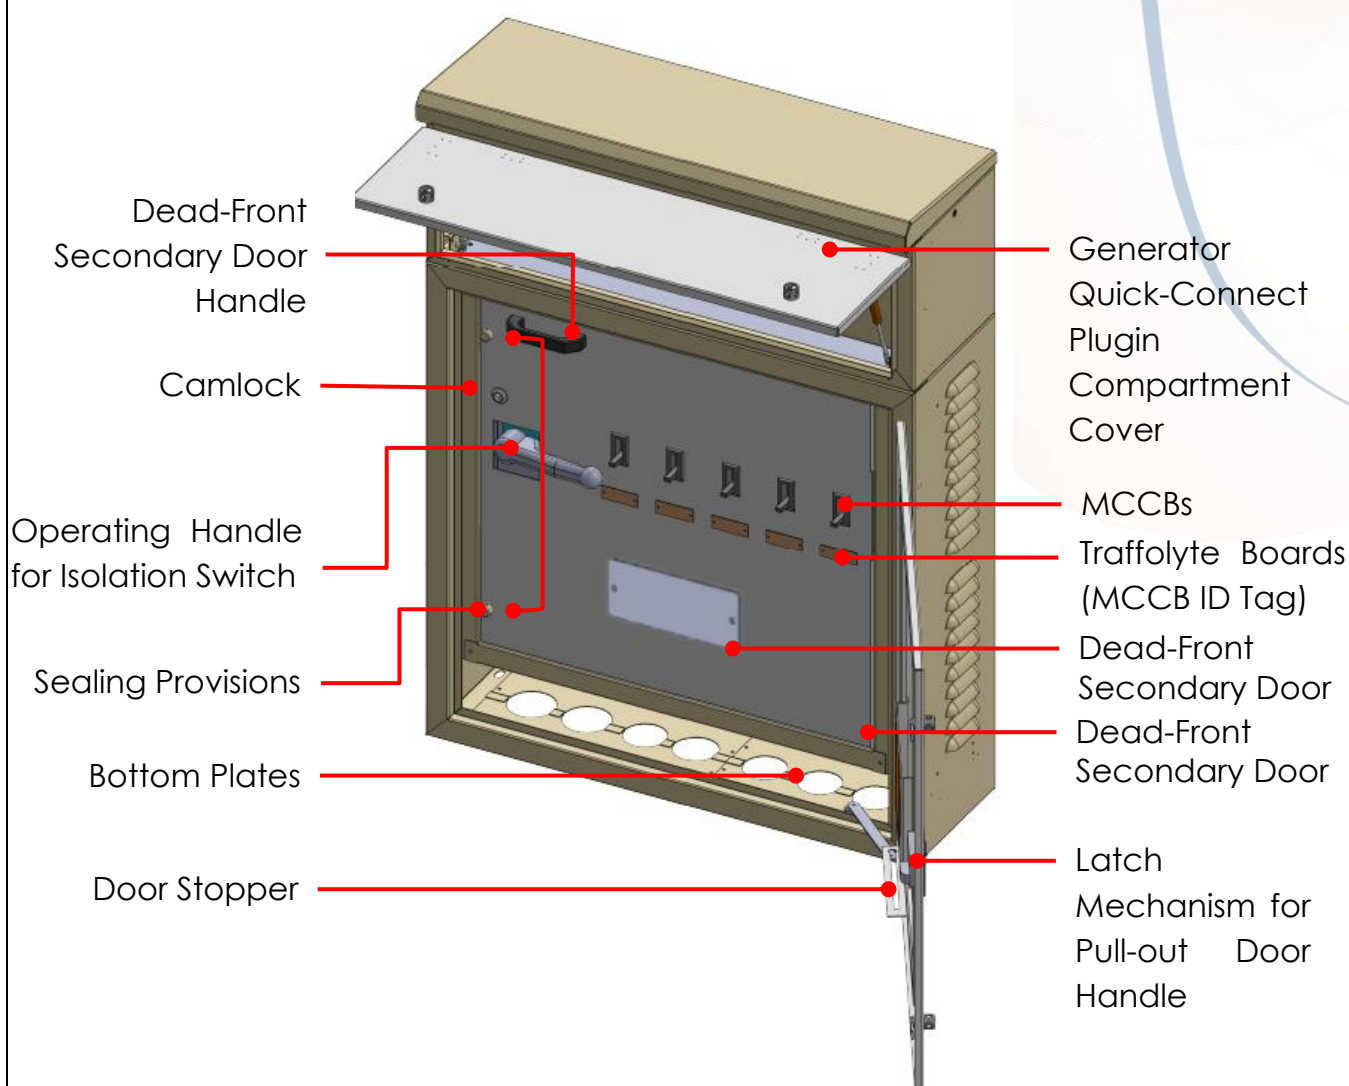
Layout Drawing of a 5-way Mini-Pillar with Generator Quick-Connect Plug-in Compartment Showing the Maximum Allowable Dimensions
